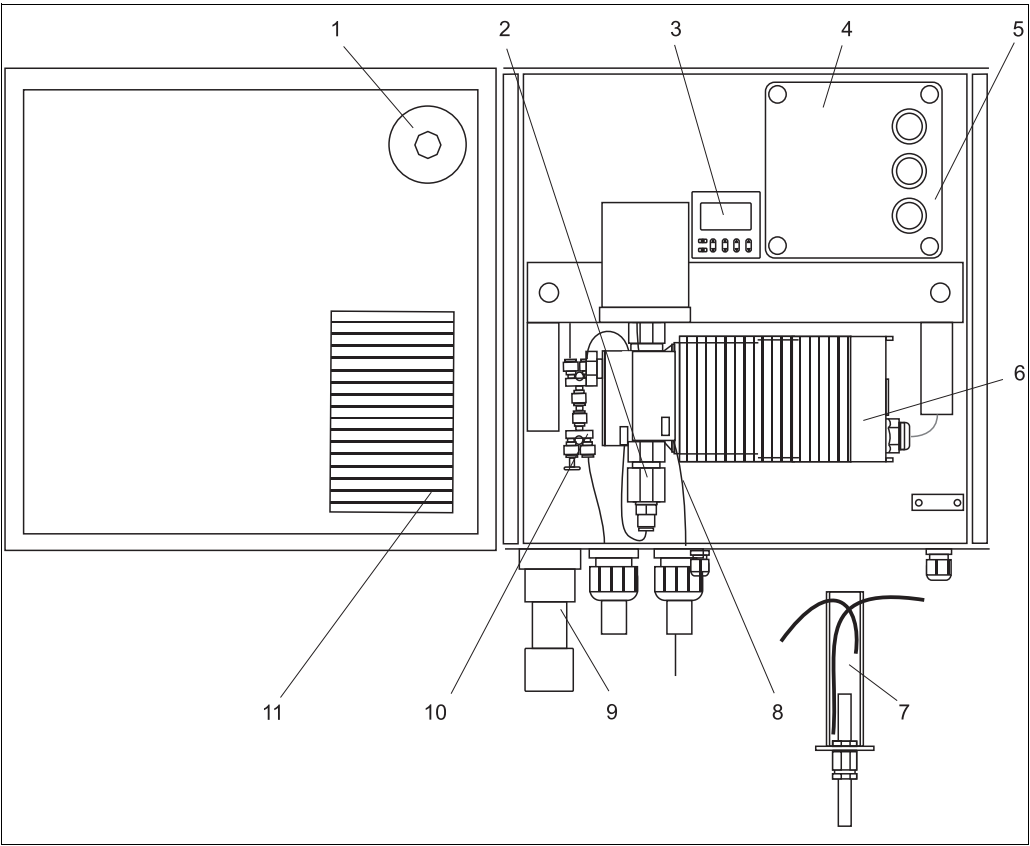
Control box CAT430 and collecting vessel of CA7X
